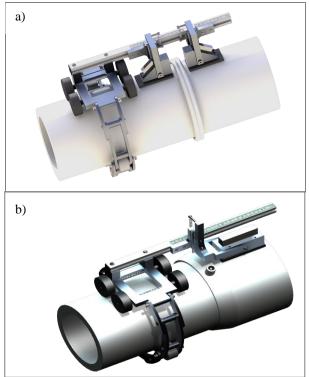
CAD design of the TestPEP inspection system without an encoder on the carriage for: a) BF joints, and b) EF joints.
